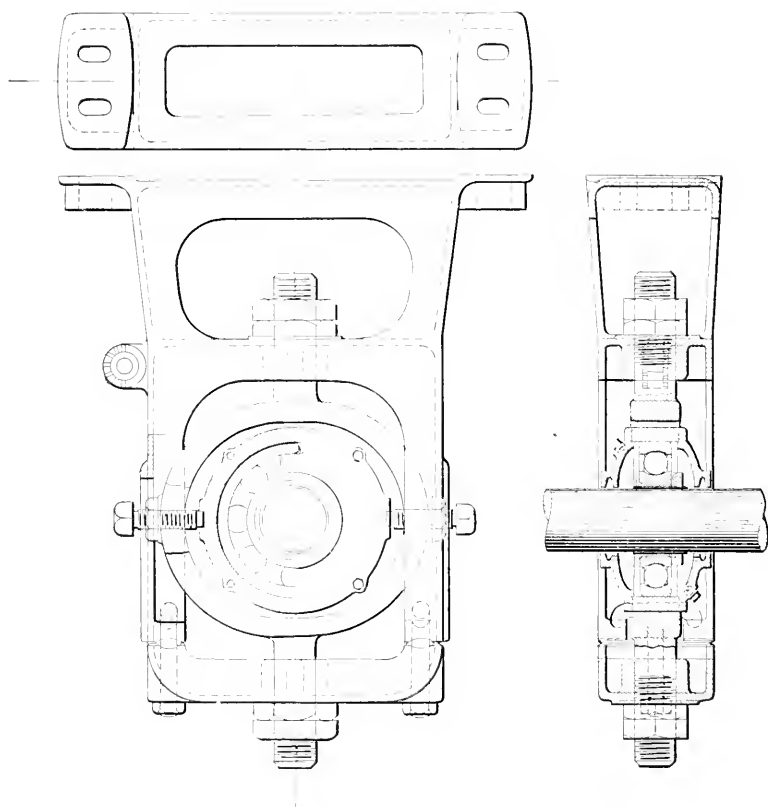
ARRANGEMENT OF BALL-BEARING HANGER
